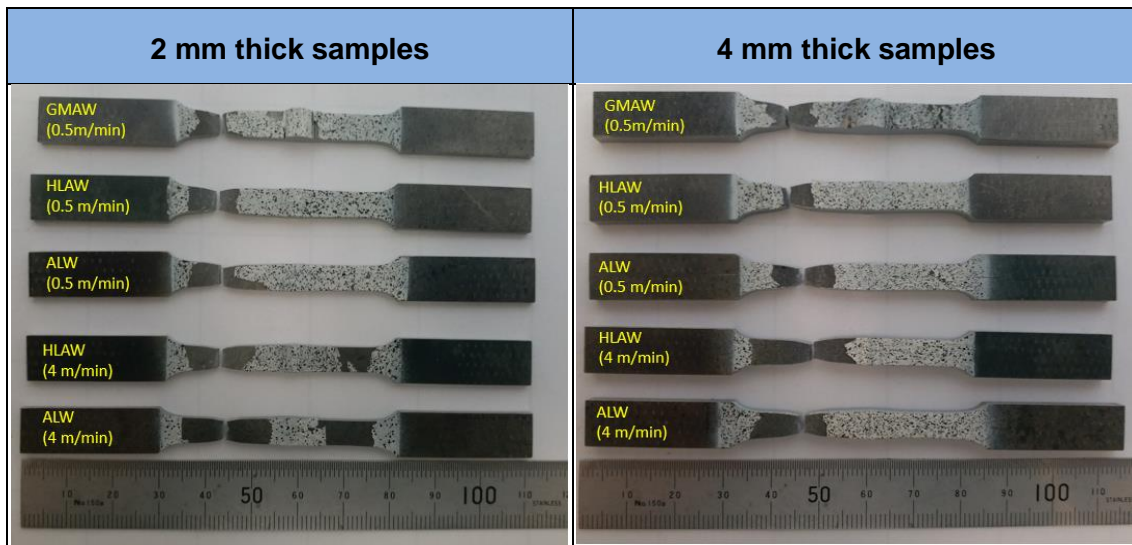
Photograph of 2 mm and 4 mm thick tensile samples welded at different conditions – Welding process (Travel speed)
